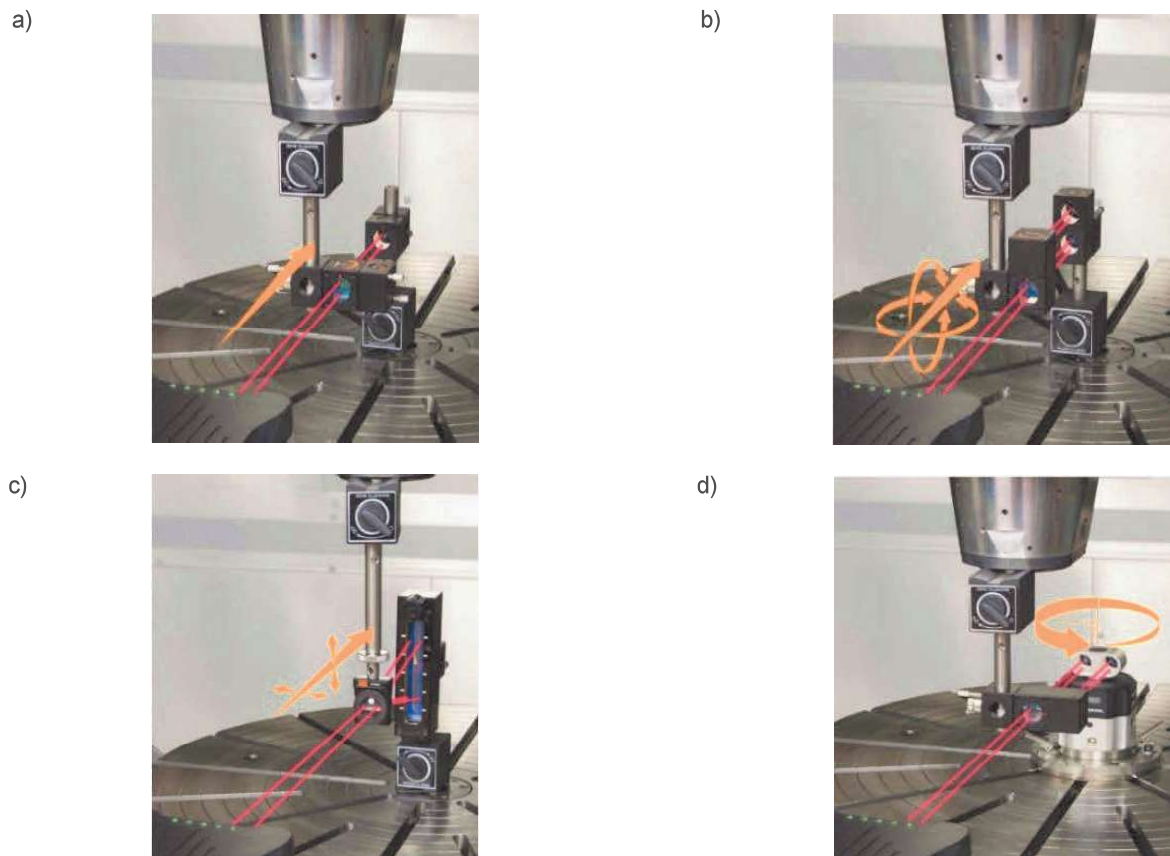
Renishaw XL-80 laser interferometer in the configuration for: a) linear measurements, b) angular measurements, c) straightness measurement, d) rotary axis measurement using the XR20-W head [6]
